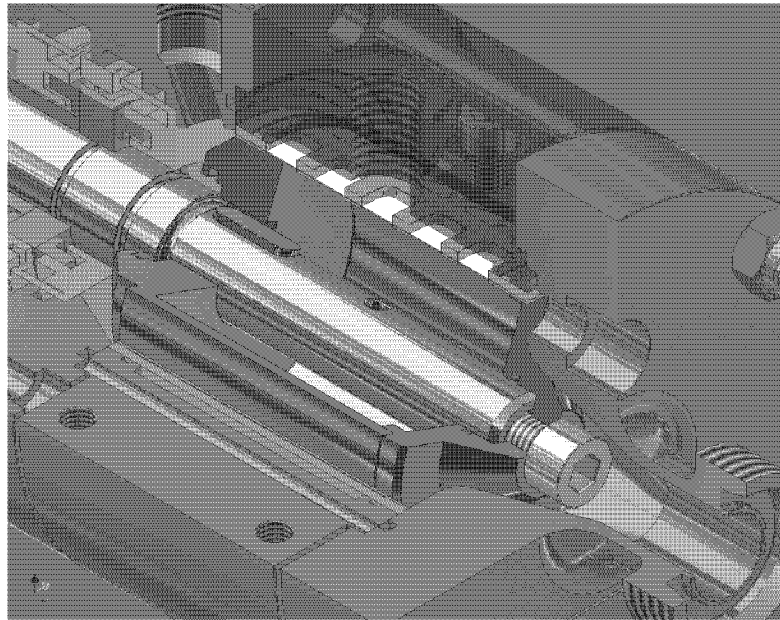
CAD-drawing of the membrane device with membrane mounted to housing and inner, rotating cylinder made of compact metal.
